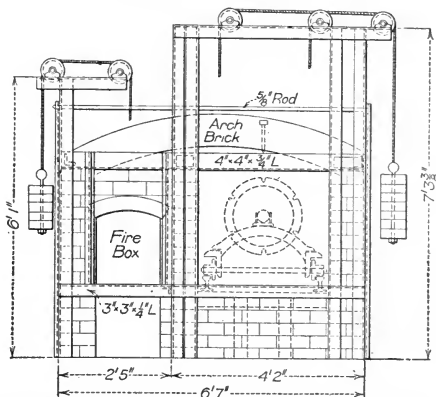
FRONT ELEVATION OF SINGLE-DRUM COKE BURNING FURNACE
